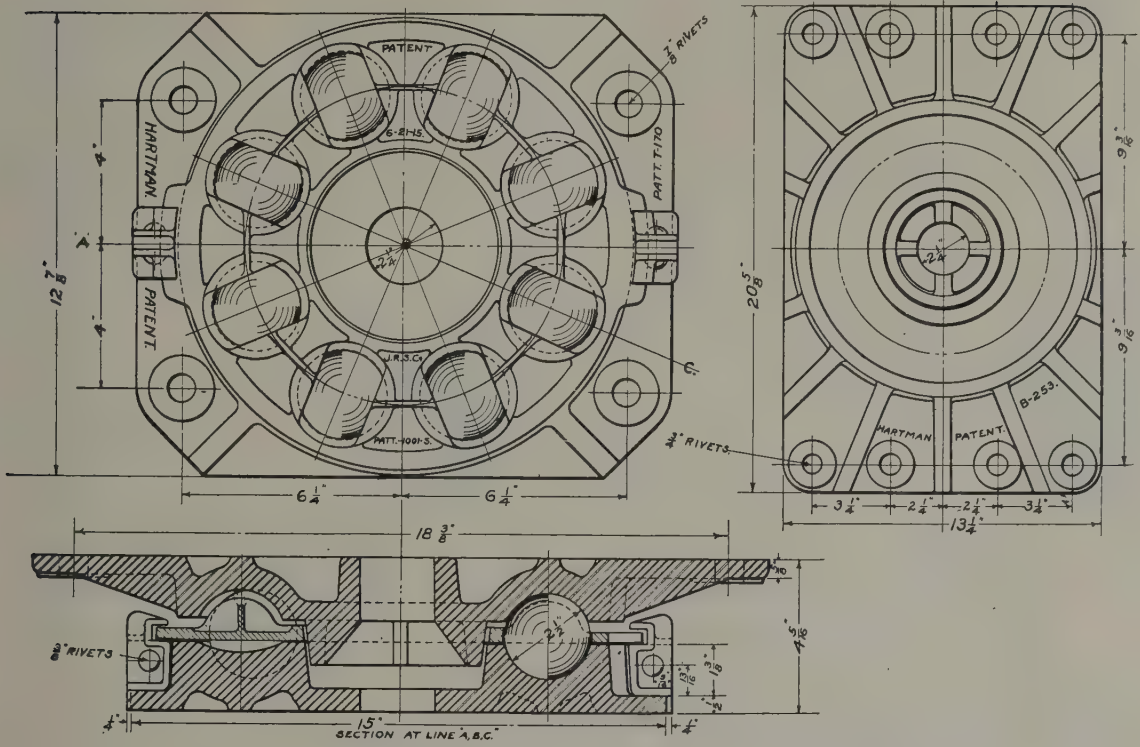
Hartman Ball-Bearing Center Plate. Joliet Railway Supply Company.
